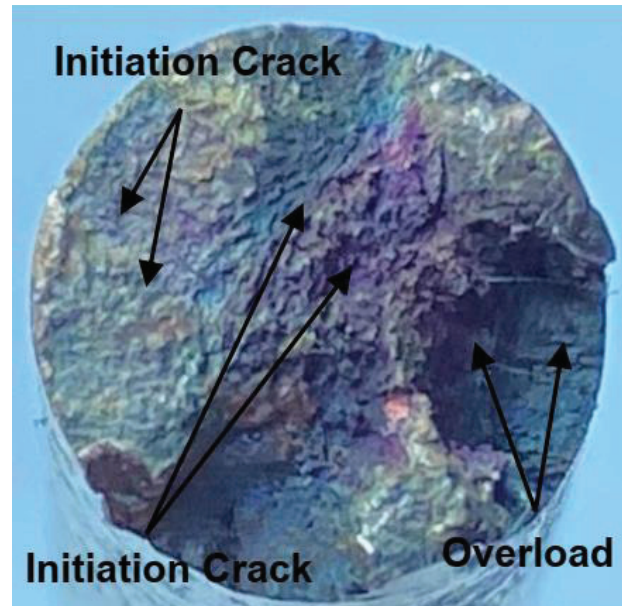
The fracture surface of AISI 1050 Steel
